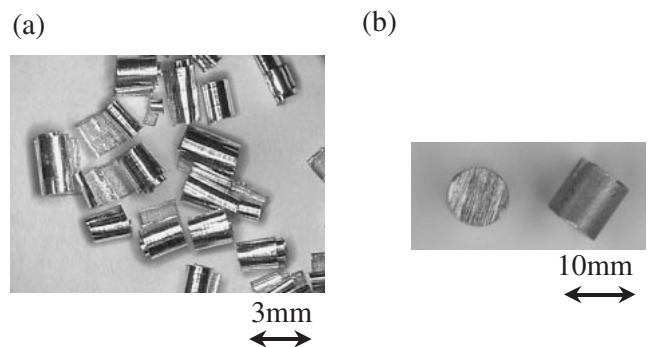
Photographs of (a) machined chips and (b) cylindrical scraps of AZ31 Mg alloy.
